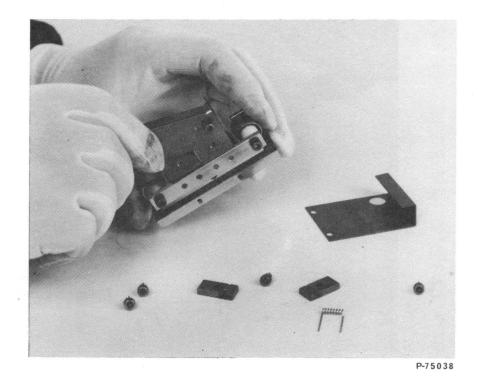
Loosen the screw (holding the beam former) enough to slide it off the assembly.
